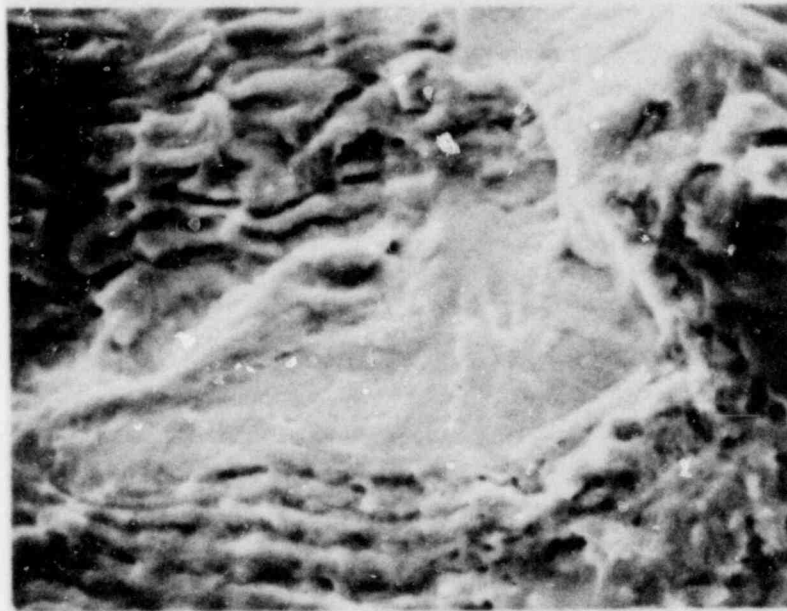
Fracture surfaces of specimen F-9 - 1-min ramp- and 1-min hold-time, $R = 0.2$, temperature = 288°C .
